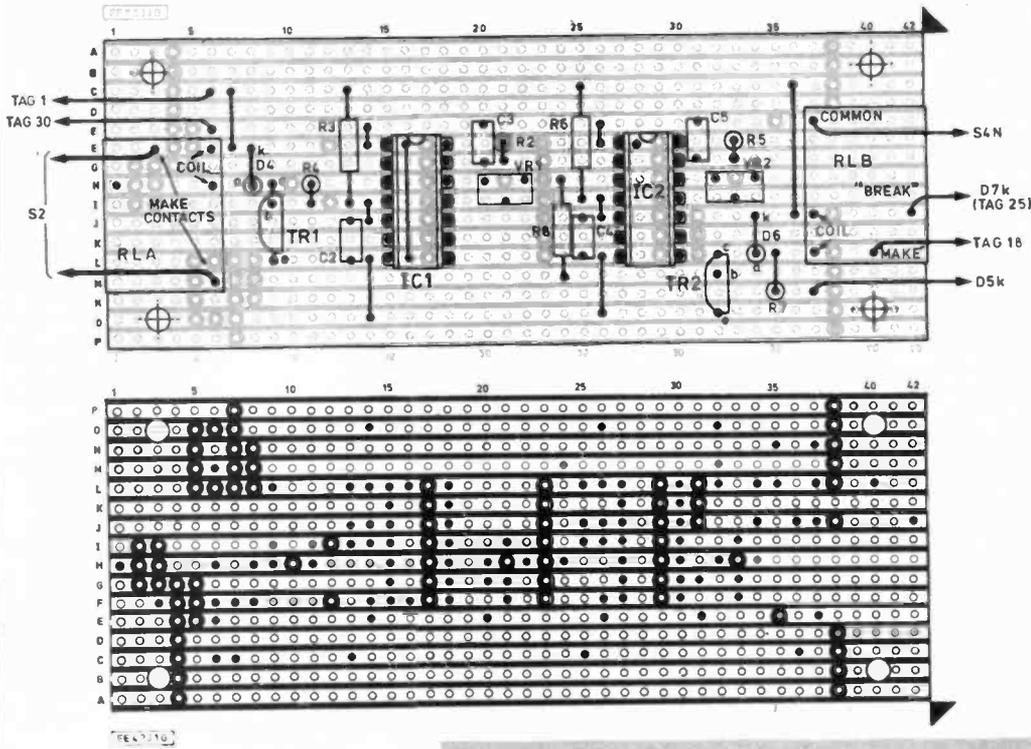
(left). Striboard component layout and details of breaks required in the underside copper tracks.
